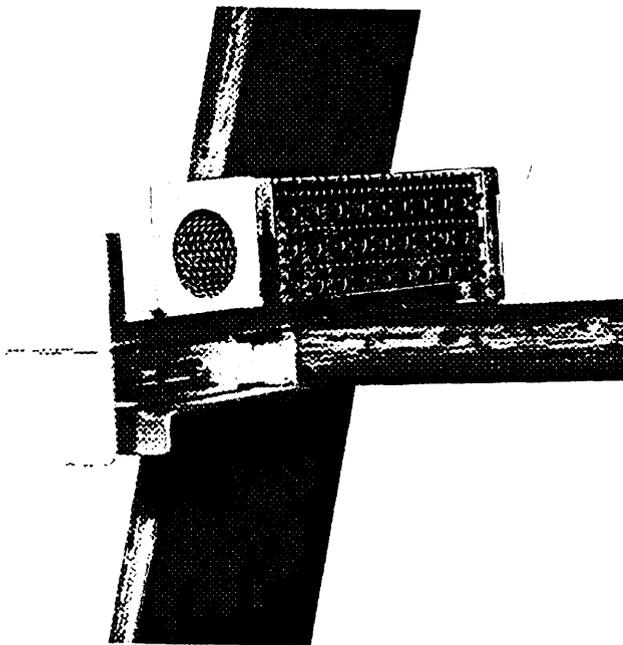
Soldering Iron Cage Equipped with Wiping Pad.
